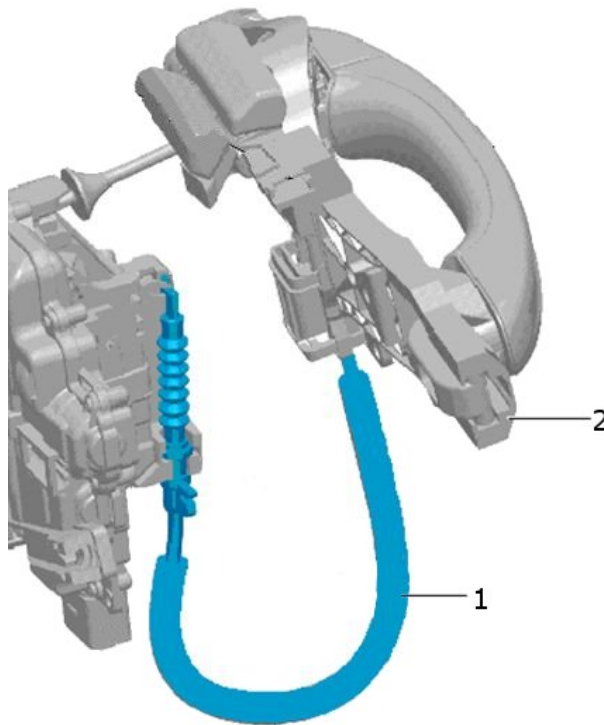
Bowden cable (1), and door handle mounting bracket (2).
